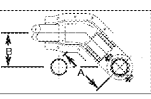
Jump-over assembly made with clamshell fittings of next size up to span over section gap.
